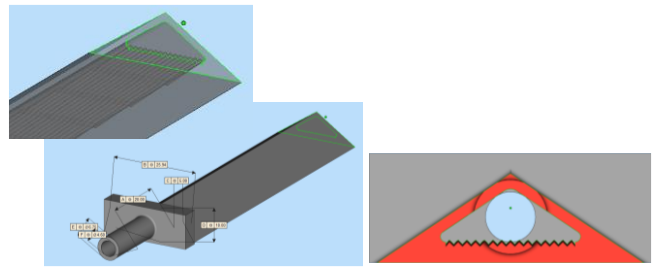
Test Specimens No.3 (Triangular cross-section and Bottom step, Bottom groove)
